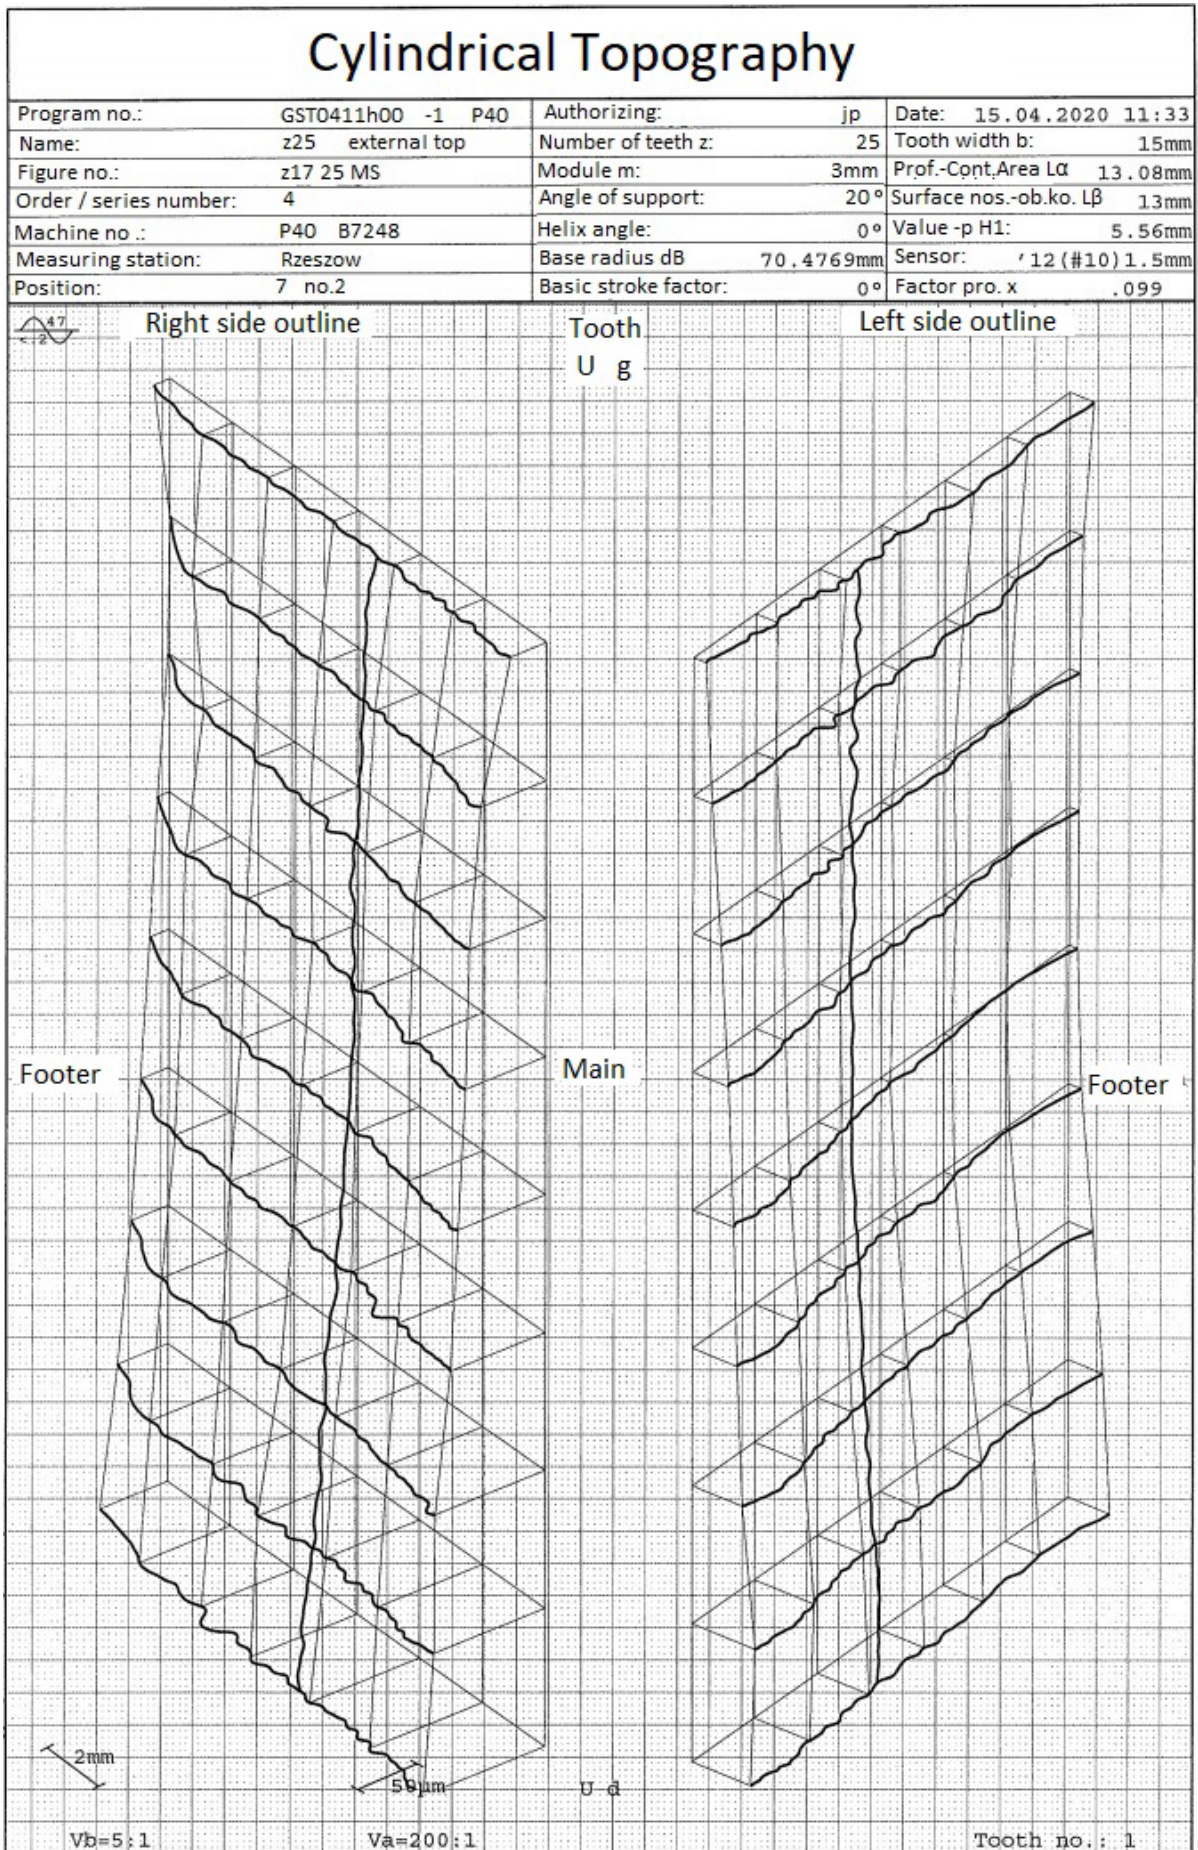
Topography of a large gear tooth made of P2 material (KZ25)
